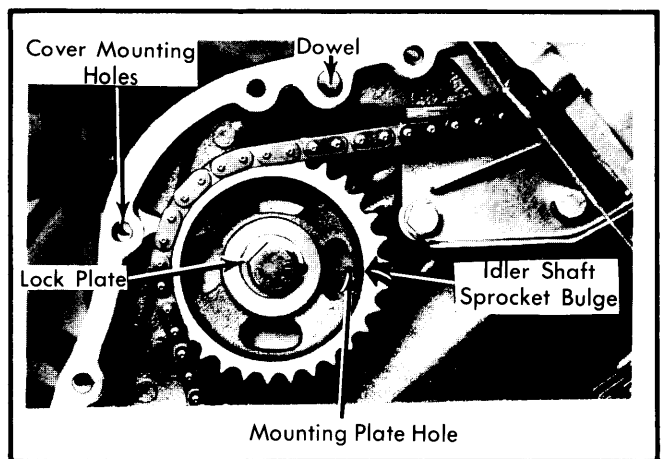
Idler Shaft Index Marks. Bow in Cutout on Idler Shaft Sprocket Must Line Up with Small Hole in Mounting Plate.
